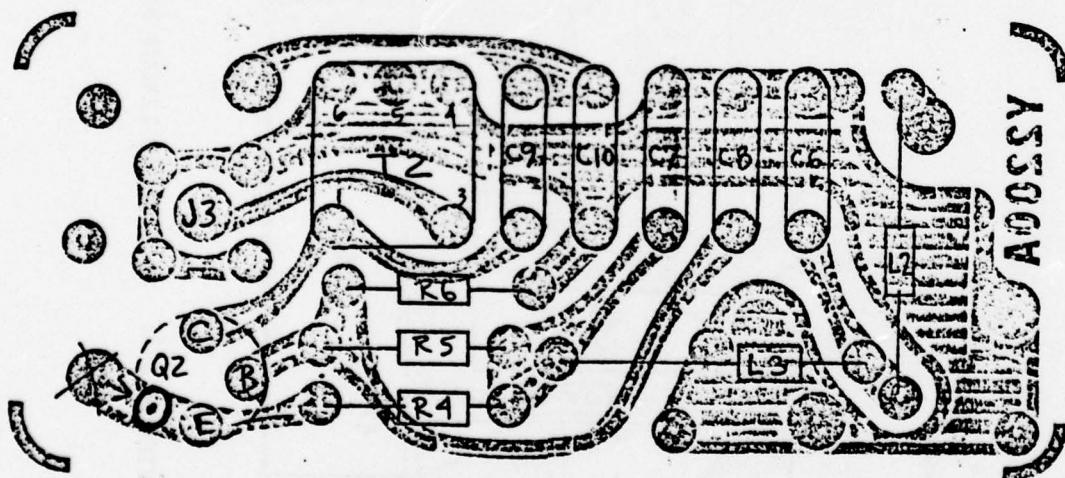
P.C. BOARD LAYOUT FOR A1600A VHF TUNER
